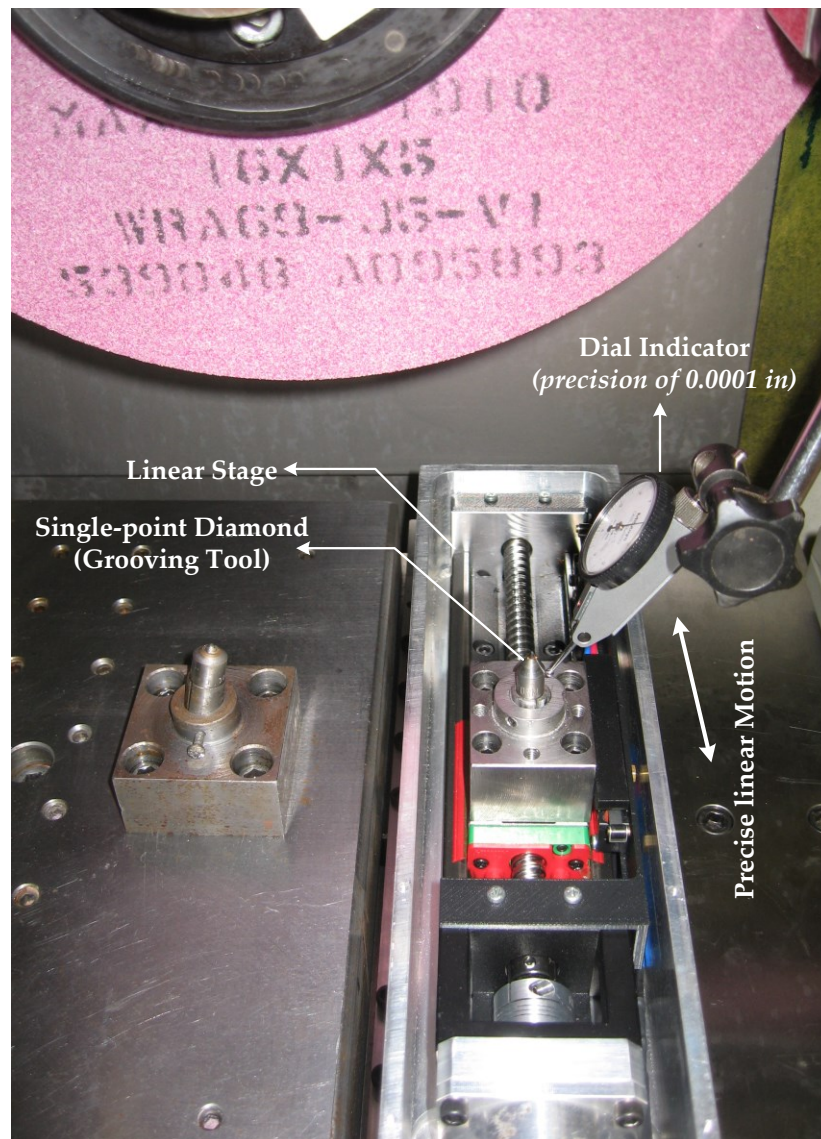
Figure C: Adjusting and mounting the grooving system on the grinding machine table to ensure the linear motion of the grooving tool is precisely parallel to the grinding wheel axis
